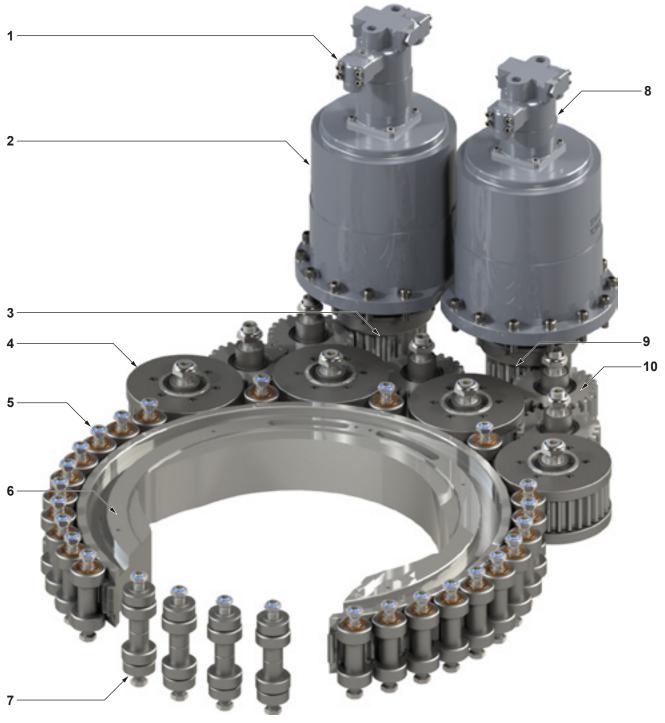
CLE22000XHT-14 Gear Train ISO View
